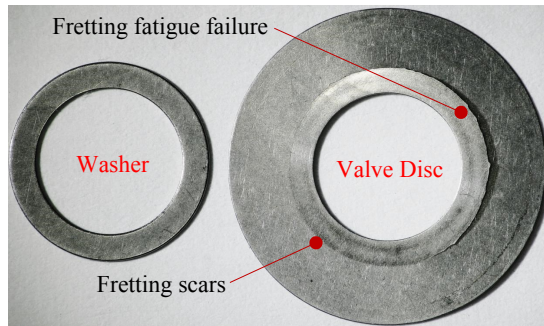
Fretting fatigue failure at automotive shock absorber valve disc.
